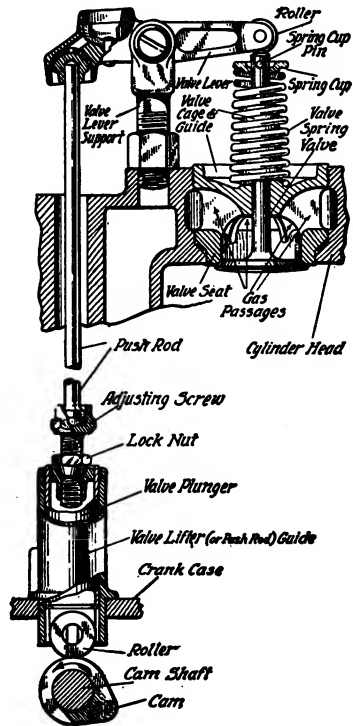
Typical Overhead-Valve Layout, Showing Complete Mechanism
